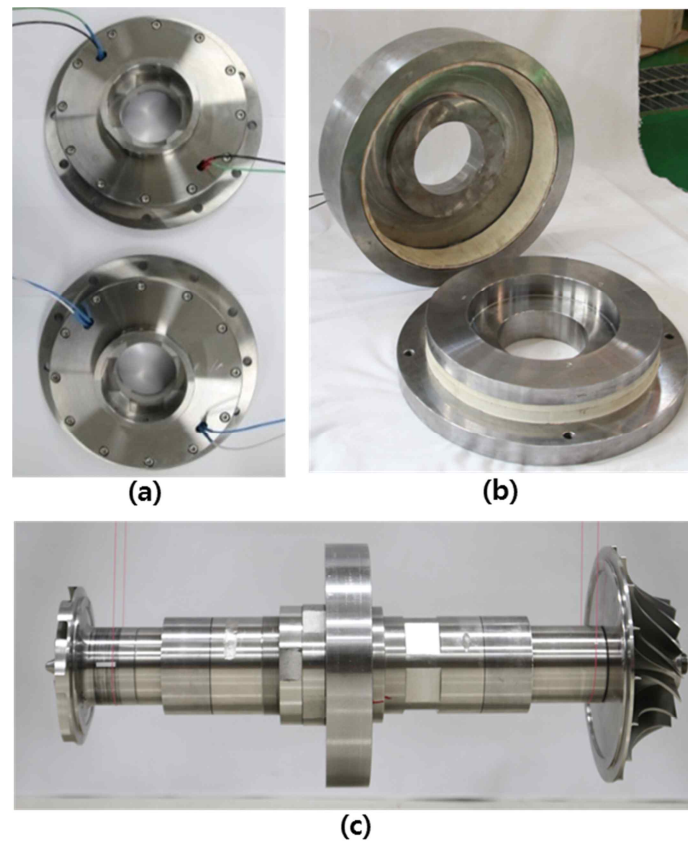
Manufactured (a) Radial Magnetic Bearings, (b) Thrust Magnetic Bearing, (c) Rotor for Pump-driving Turbine
